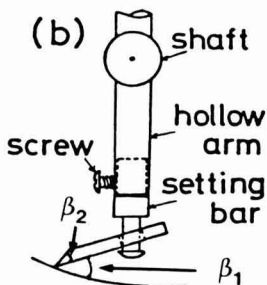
DETAILS OF ATTACHING FLOATING BLADE TO SHAFT
